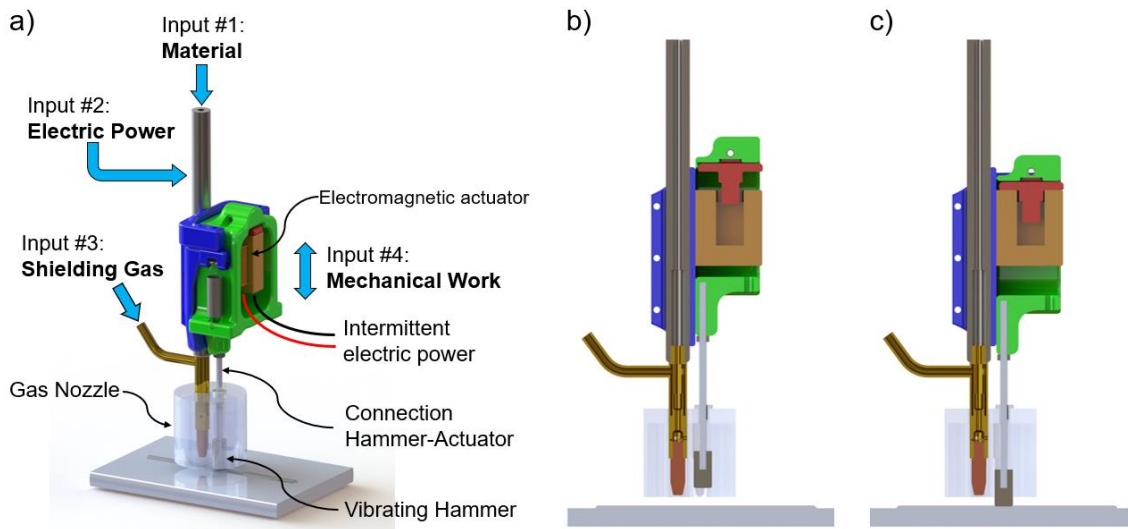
CAD model of the proof-of-concept torch prototype (a) with a section view showing the hammer in the retracted (b) and extended position (c)
